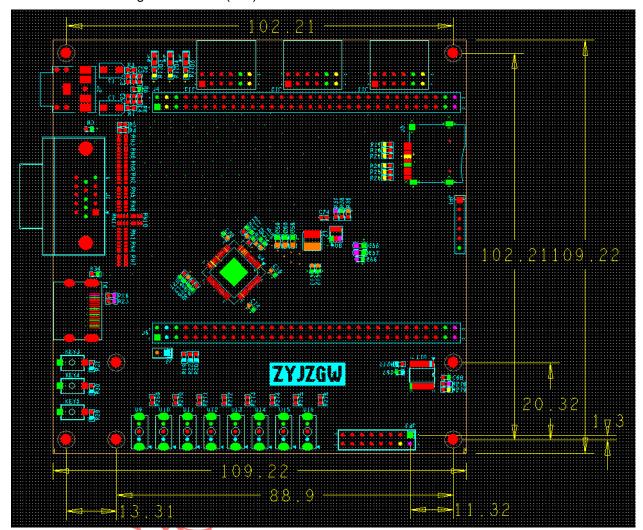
ZYJZGW XC7K325T Daughter Board Dimension
